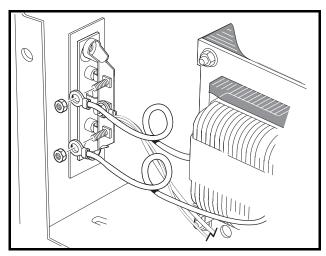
Remove Secondary Coil Wires From Heatsink
